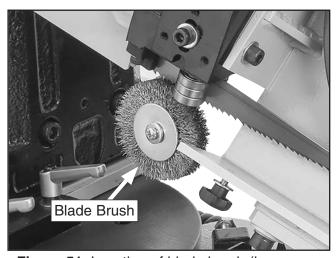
Location of blade brush (lower rear blade guard removed for clarity).
